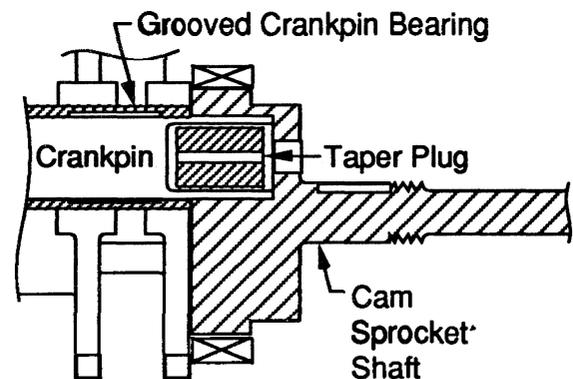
Modified Hypocycloid Engine Crankshaft Assembly
